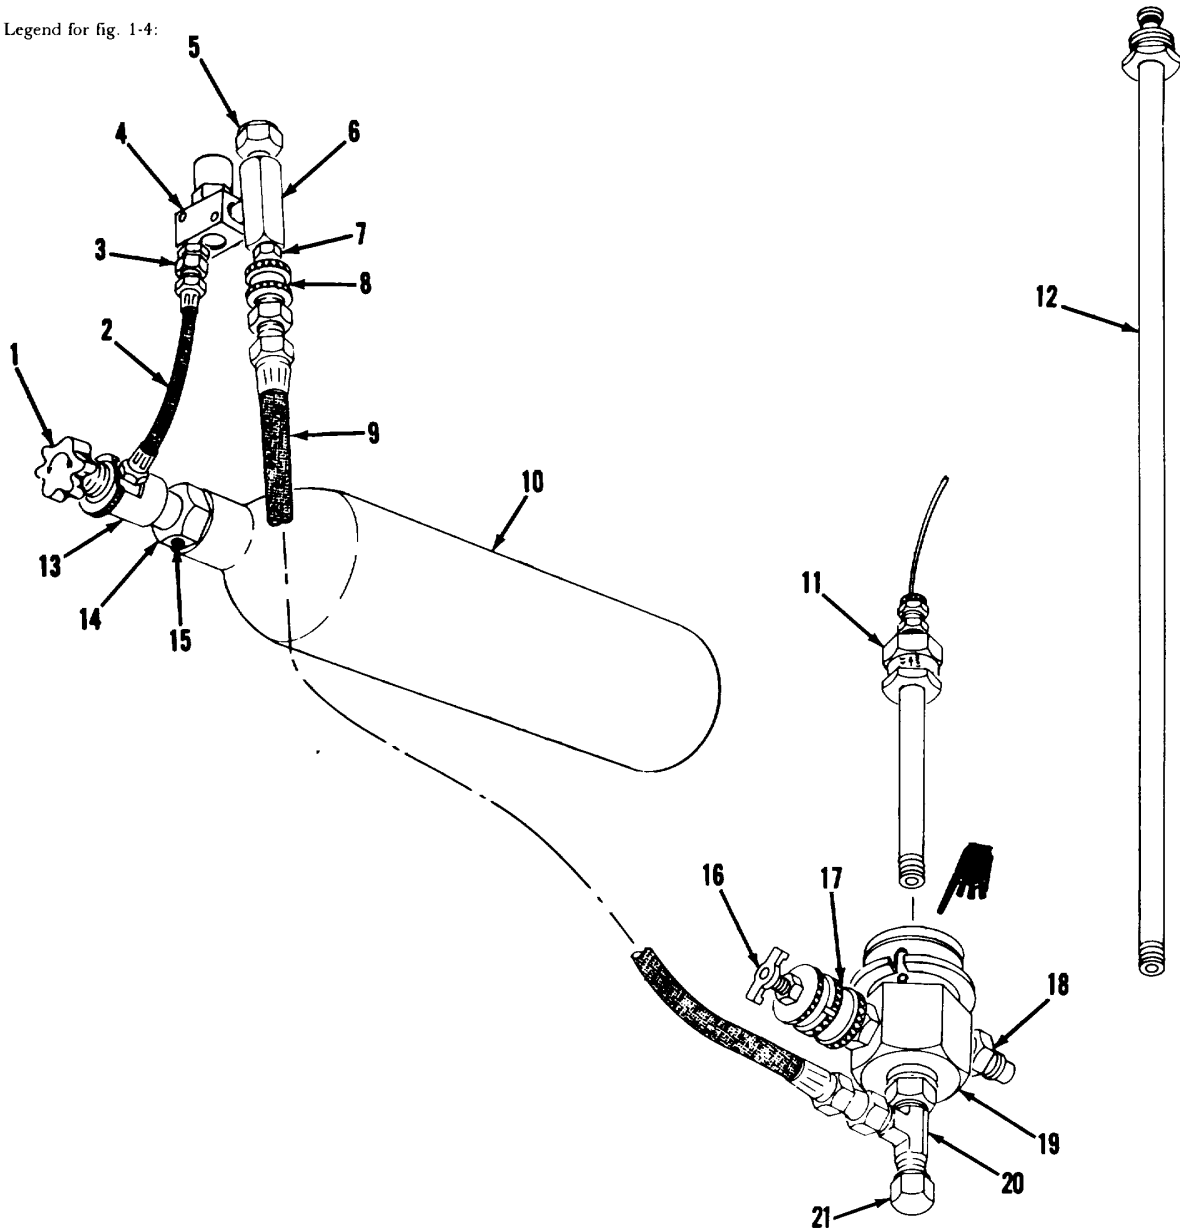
Compressed Gas Cylinder (agent container assembly)*.
